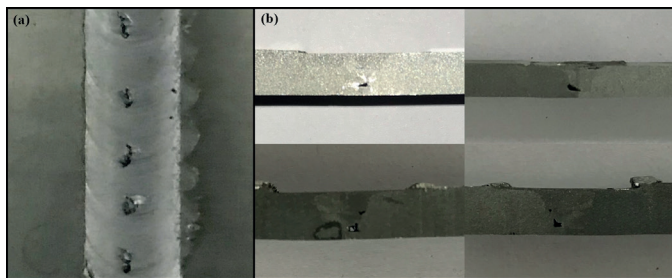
a) Surface Defects which appear due to high tool rotational speed were observable in Samples 7, 8 and 9 due to high RPM; and b) Porosity which appear due to high tool feed were observable in Samples 3, 6 and 9. Sample 5 and 8 also displayed porosity at some points in the welded region
